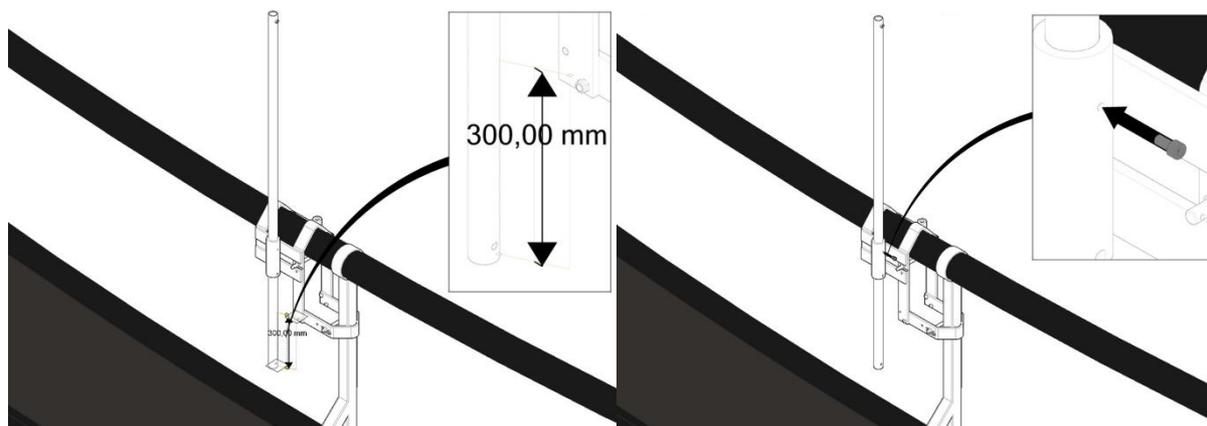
Mount the mast in the mounting bracket and secure it with a set screw.
